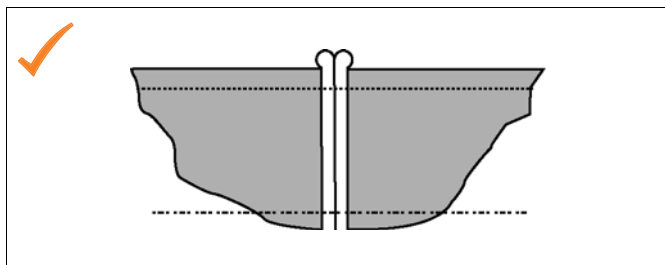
Butt-weld with big welding beads (acceptable)
